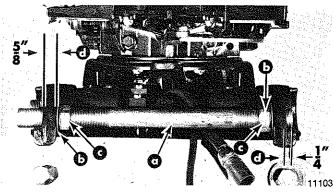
Tilt Limit Switch Connected to Hydraulic Pump
